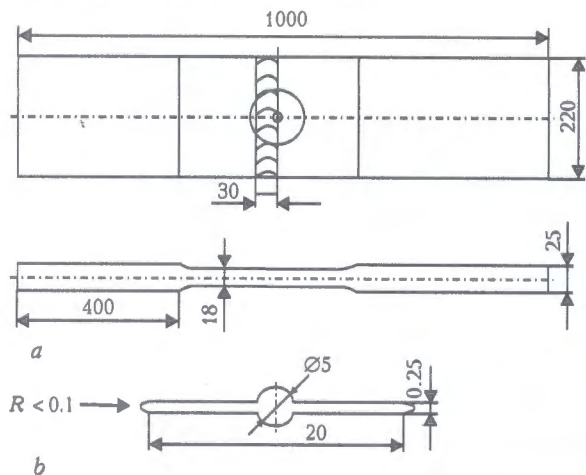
Shape and sizes of welded specimen with removed reinforcements (a) and initial notch of a through central crack (b)
